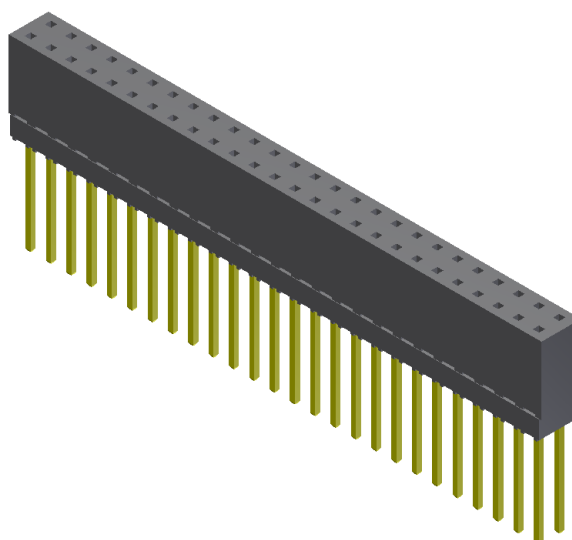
Samtec ESQ-126-39-G-D CAD model
